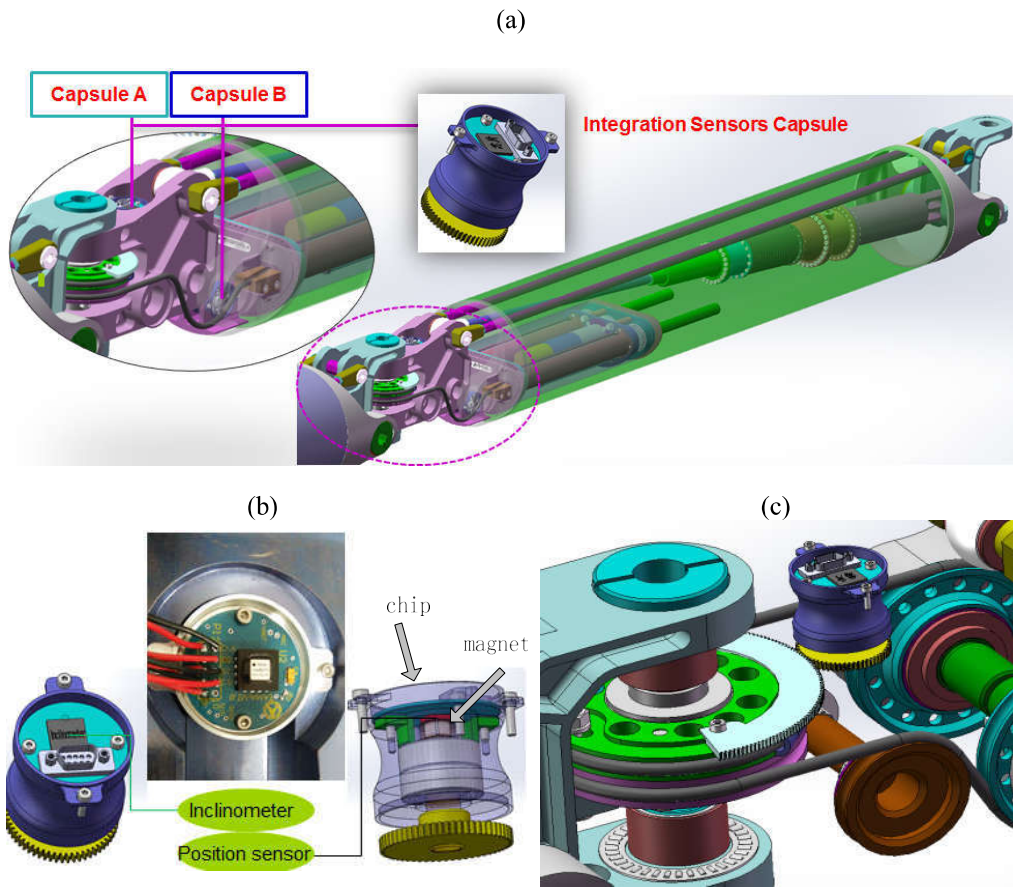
(a) Mechanism installation of the integrated sensor capsule in Segment 4; (b) AS5047D encoder accurate machine construction; (c) Perspective joint prototype.
